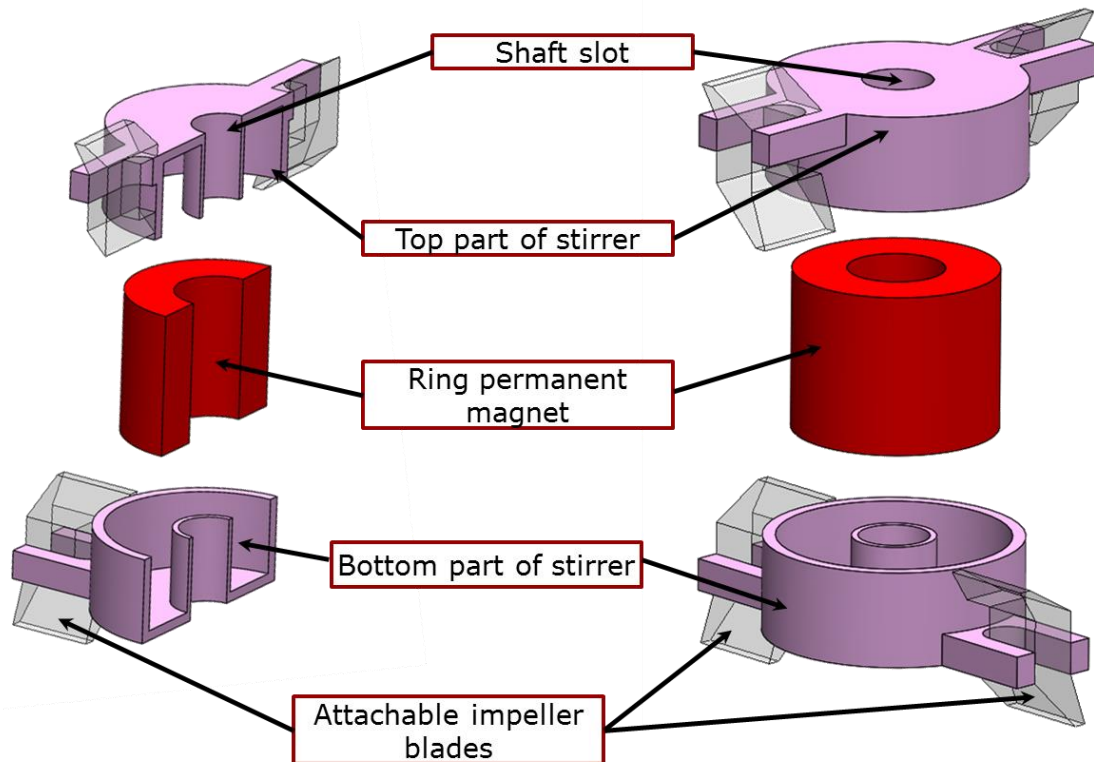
Mixer design (Dassault Systèmes SOLIDWORKS Corp., DTU licence). The stirrer consists of two cylinder pockets where a ring-shaped magnet is encapsulated. Each cylinder has two forks for holding two blades, so the impeller blades can be placed at two levels. A technical drawing of the stirrer is presented in appendix B.
